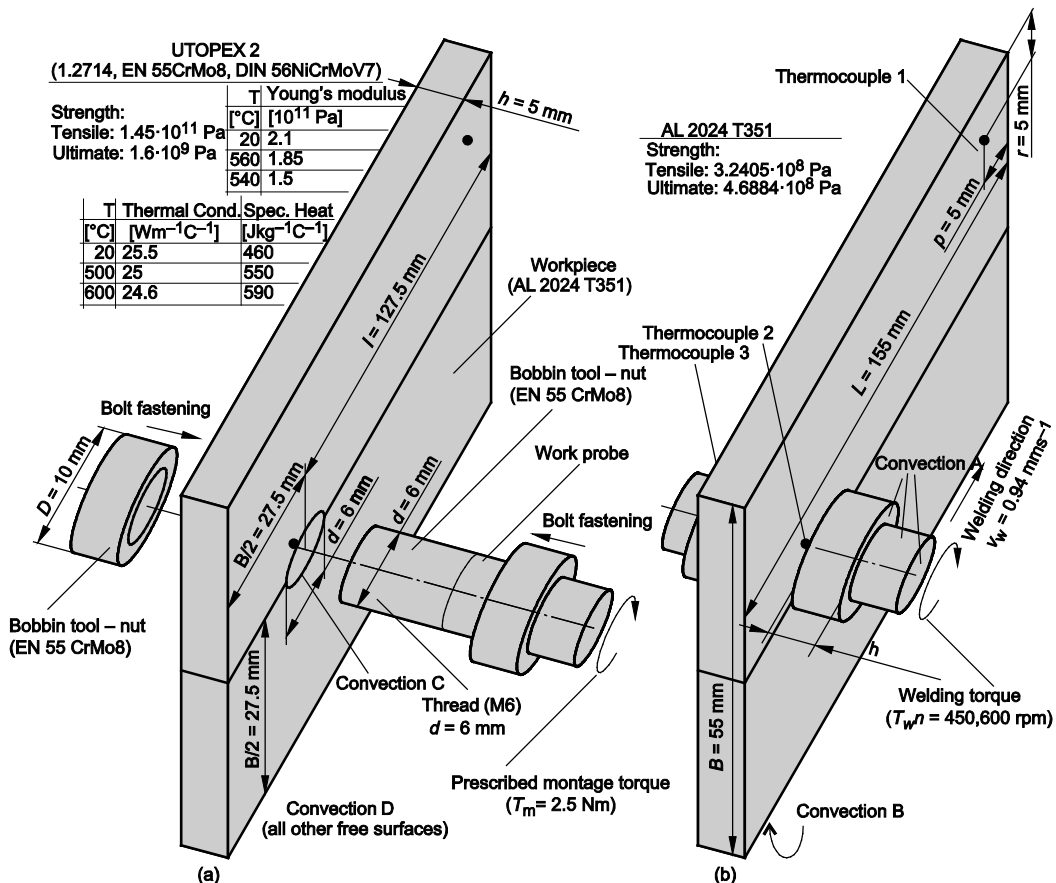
Schematic of the FSW process with bobbin tool; (a) mounting welding tool, (b) mounted welding tool
